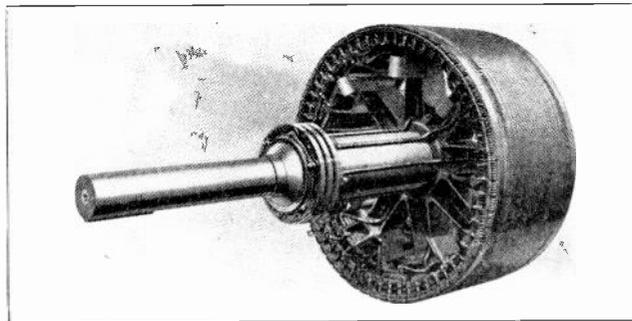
A. Phase wound rotor of a large slip-ring induction motor. This rotor has heavy bar windings which are not shorted together like those of a squirrel-cage rotor, but instead have connections brought out from each phase to the slip rings.
